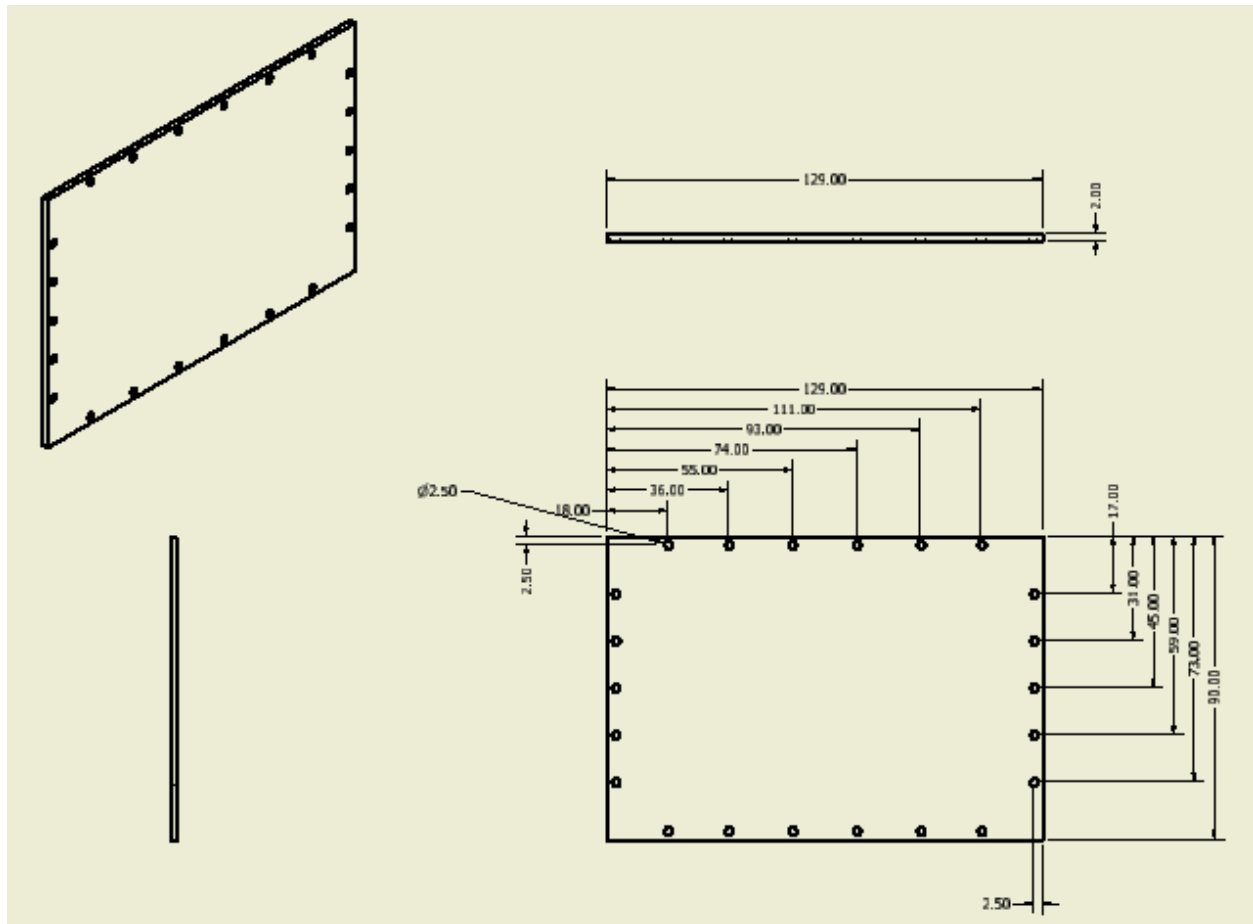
CAD drawing of the bottom plate for the second version LiMIT trenches
